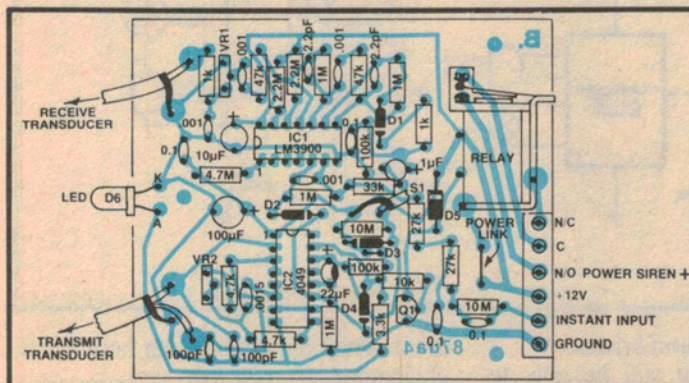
twin core shielded cable must be used to wire the transmitter for maximum drive.
